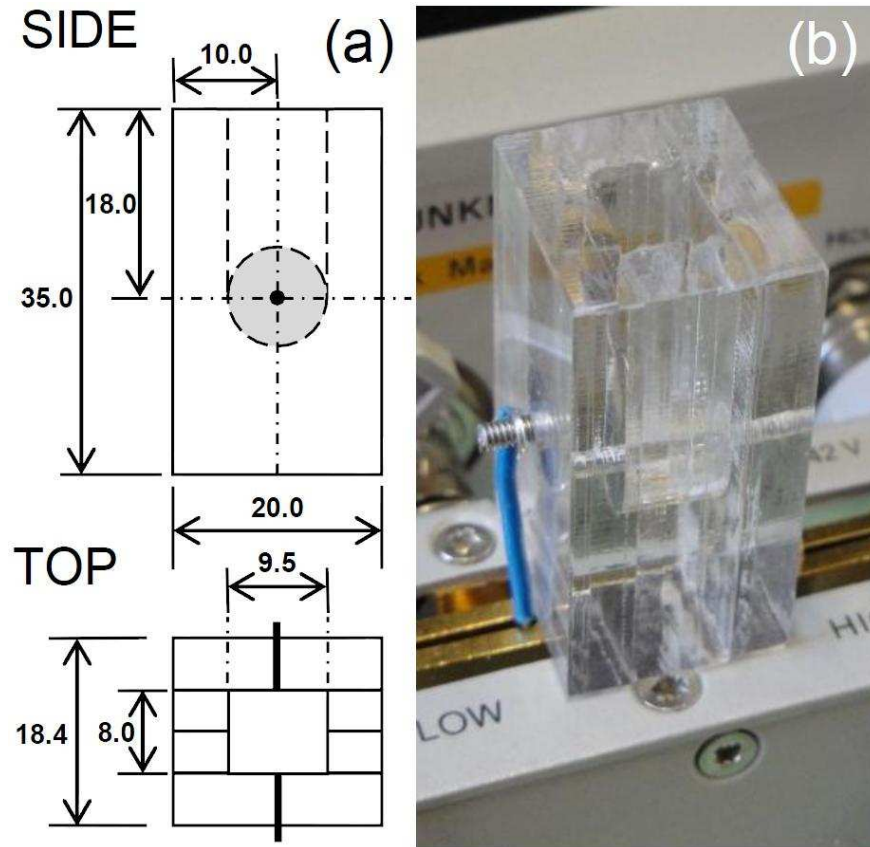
Parallel-plate dielectric cell with Galinstan electrodes (a) schematic and (b) picture. Cell is mounted on the Agilent 16047E test fixture. Dimensions are in mm.
